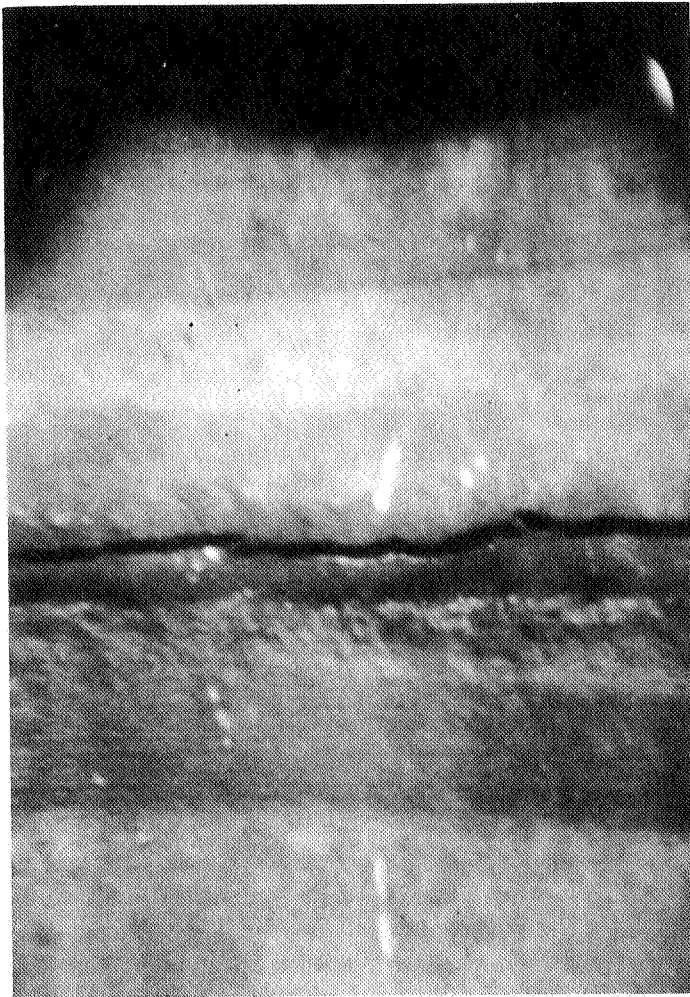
Crack in weld of ammonia reformer catalyst tube.
